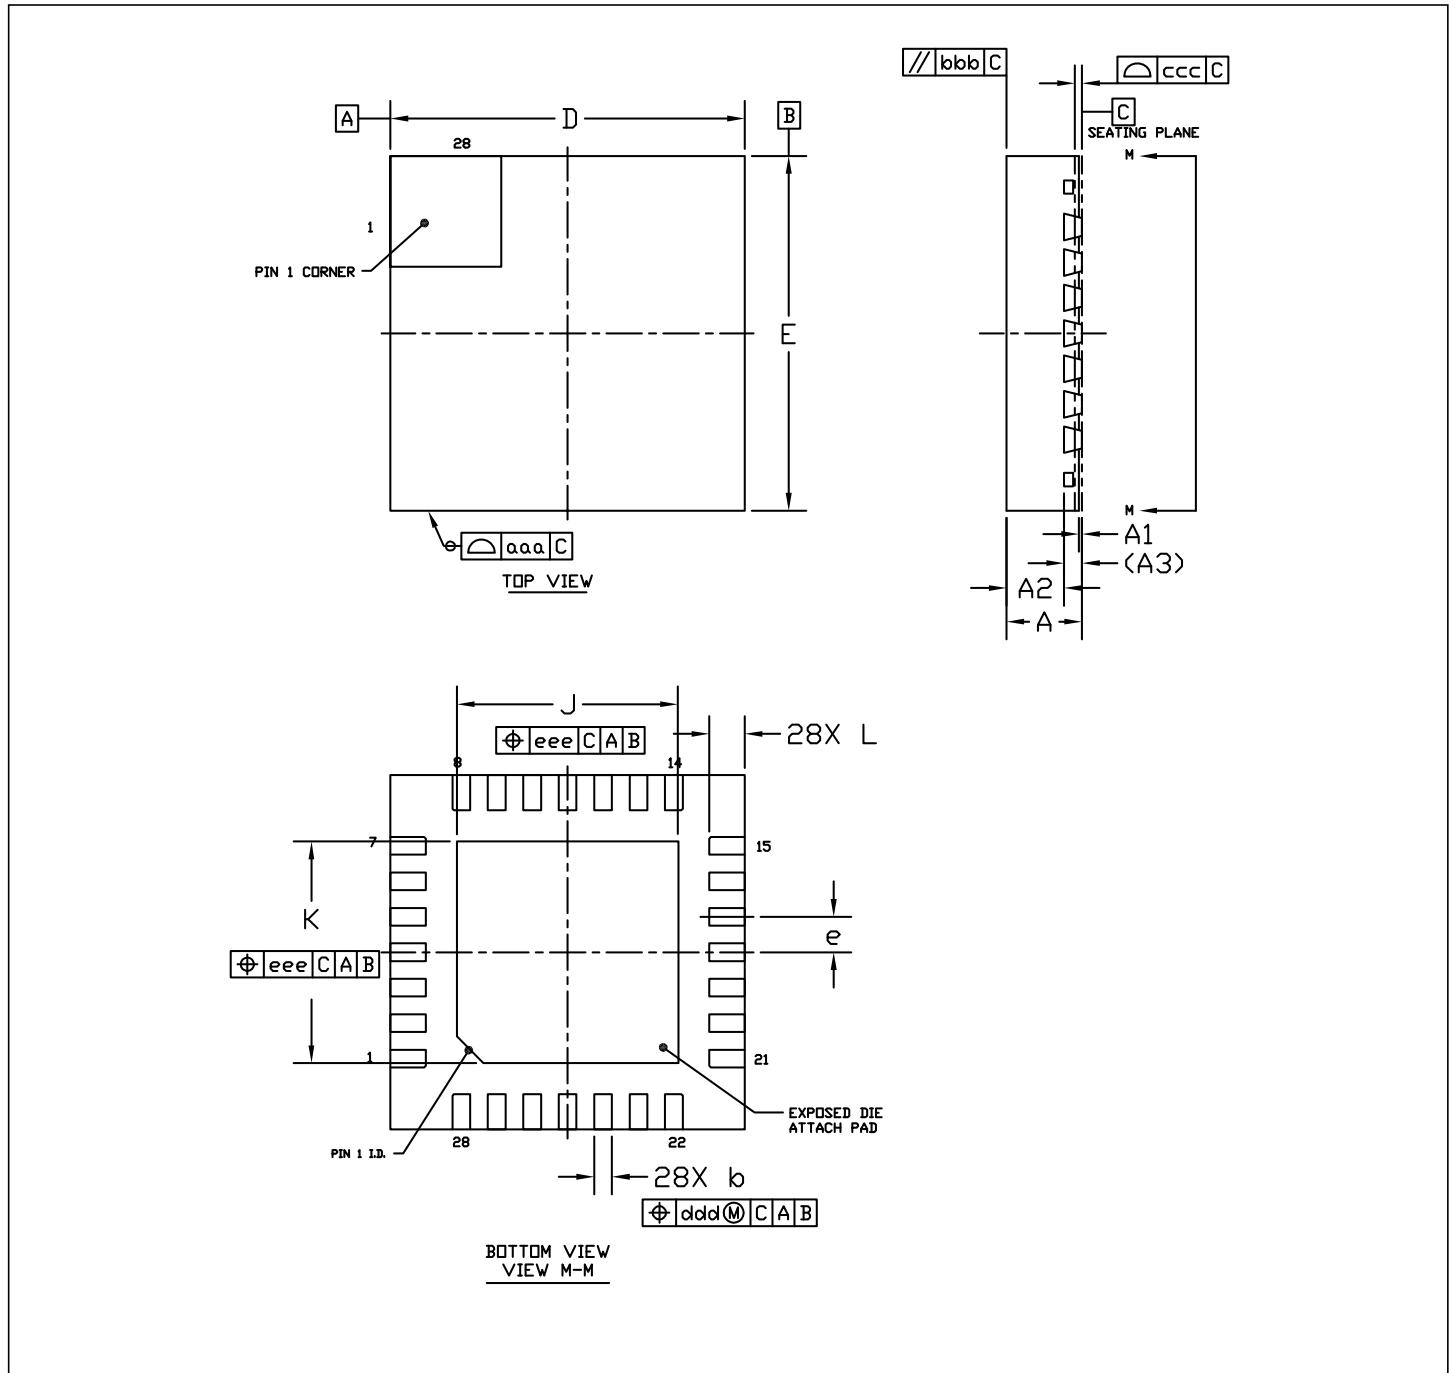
28 QFN 4x4 Package Top and Lateral Views
